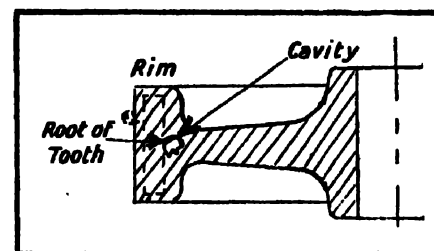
DEFECT DEVELOPED IN A CAST GEAR BLANK—MACHINING ALONE WILL DISCLOSE THIS DESTRUCTIVE CAVITY
